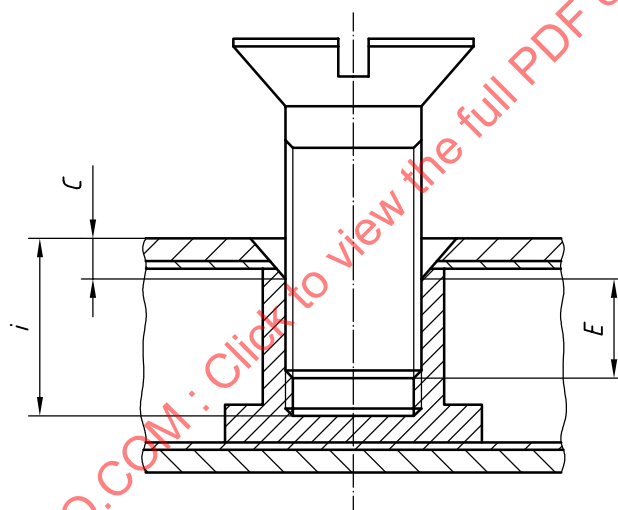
Illustration of screw thread engagement, insert well depth and countersink depth
